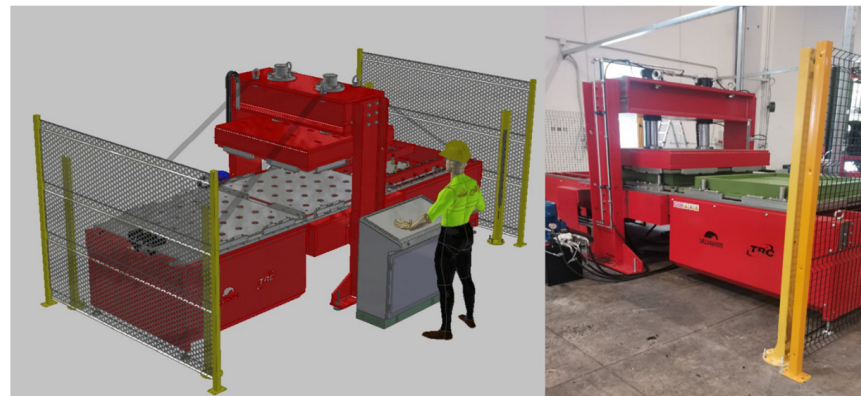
Moulding Press 60T (Salvadori®): rendering provided by the manufacturer (left) and the machine installed in the T-Cycle company (right).
